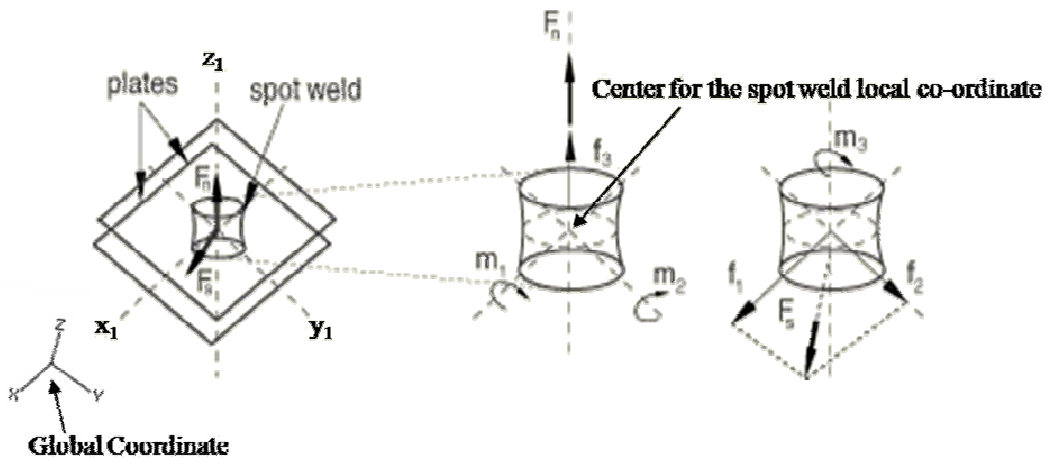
Loading components of the Spot weld in local co-ordinate [16]
